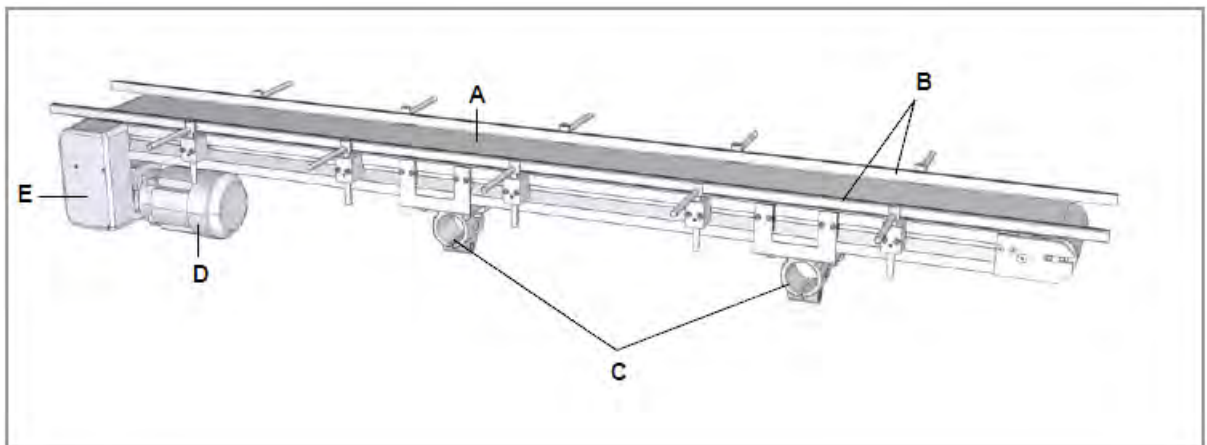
Functional elements of the B conveyor (A = Conveyor belt, B = Lateral guide rails, C = Mounting clamps for fixing the belt, D = Drive motor, E = Belt drive)
